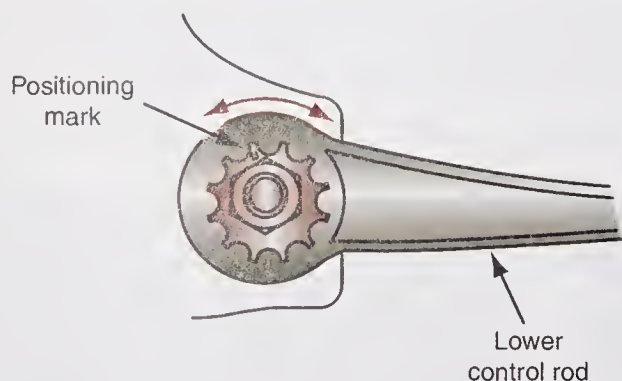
Eccentric star wheel on inner end of lower control rod for toe adjustment.
